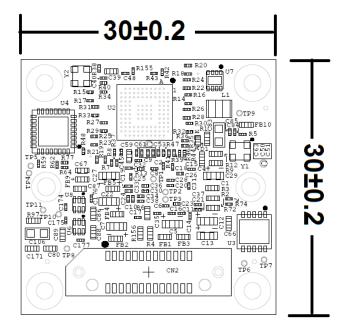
Bottom View of e-CAM217_CUMI0234_MOD Mechanical Drawing (Mirrored)
